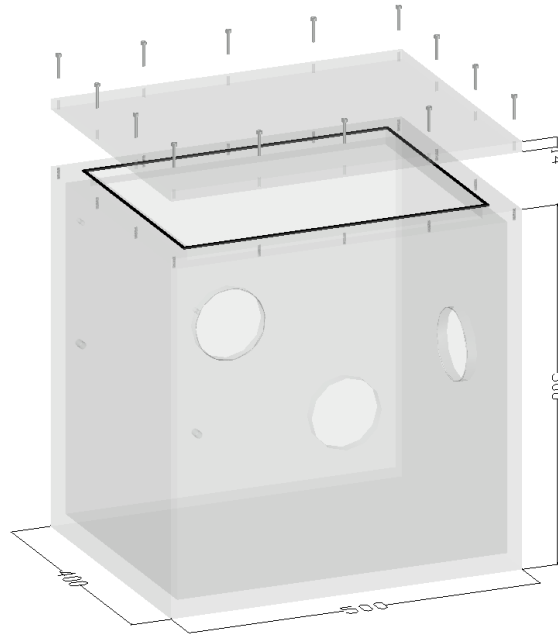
Axonometric view of the radon chamber external structure. The top side is represented when not fixed to the lower part. All dimensions are reported in millimeters.
